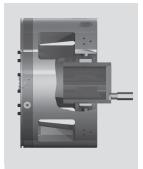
Clamping the coupling on the outside diameter with 6 jaws (3 self centering and remaining clamped. 3 compensating jaws) and machining the thread on side 1.
